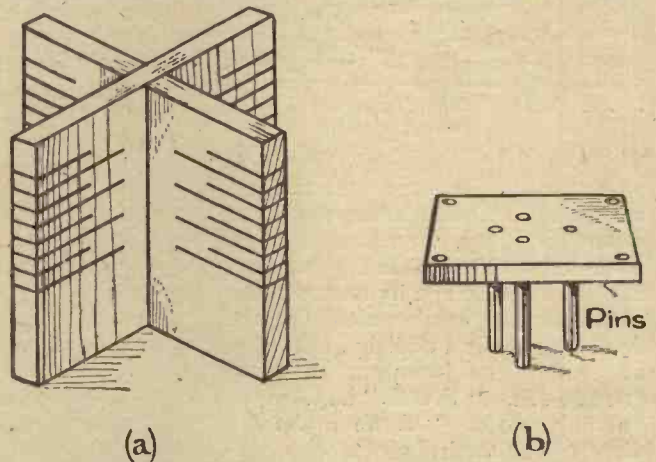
The assembled former is shown at (a), while (b) shows the base upon which this is mounted.
